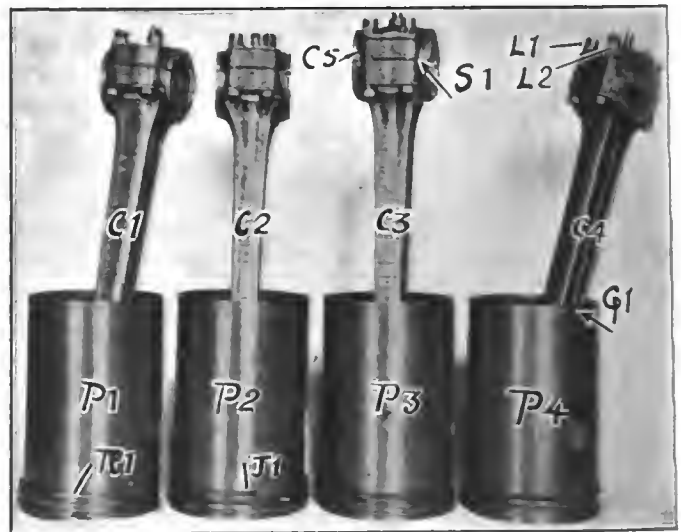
The four piston units of the Owen motor showing an H-section connecting-rod system, long pistons, and relatively light packing rings
